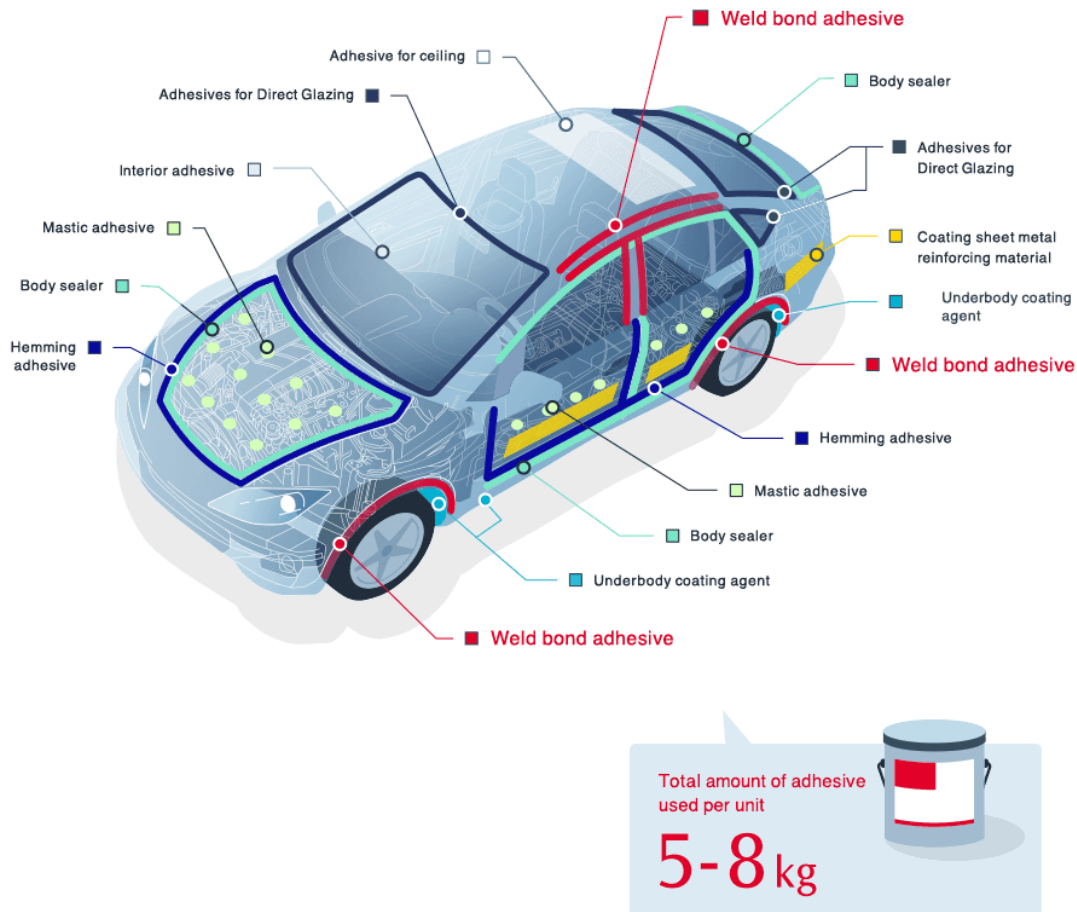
Adhesive bonding in the construction of a car [8]
